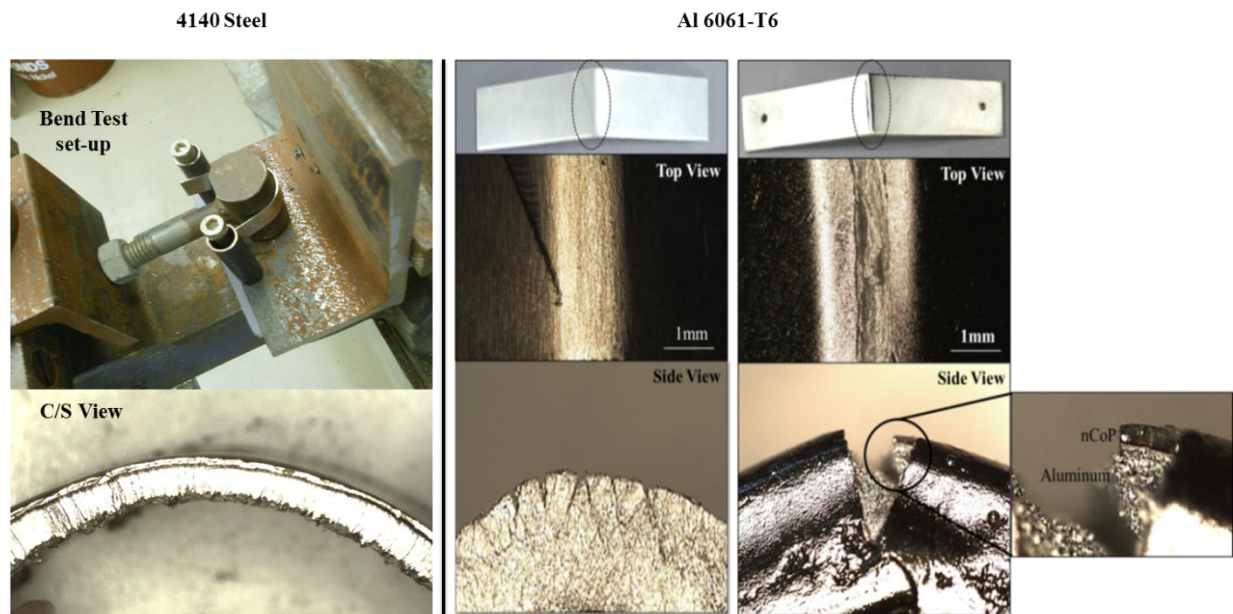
L – Figure showing bend test used on CoP coated 4140 steel and the cross-section showing no delamination between coating and substrate. Note how the coating deforms with the steel. R - Figure showing the cracked fracture surface post bend-adhesion test of bare Al 6061-T6 and nanometal on Al 6061-T6. NOTE: maintained adhesion between nanometal and Al substrate
